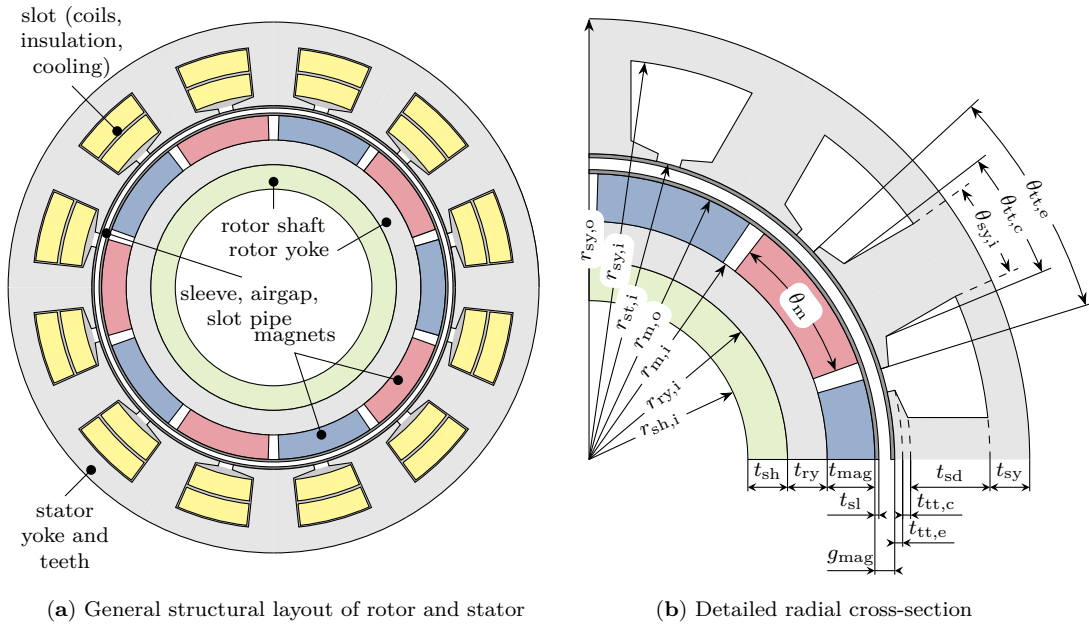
Cross-sectional view of a surface permanent magnet synchronous machine showing the active parts. Slot-specific details such as winding layout or insulation coordination will be discussed in more detail later.
